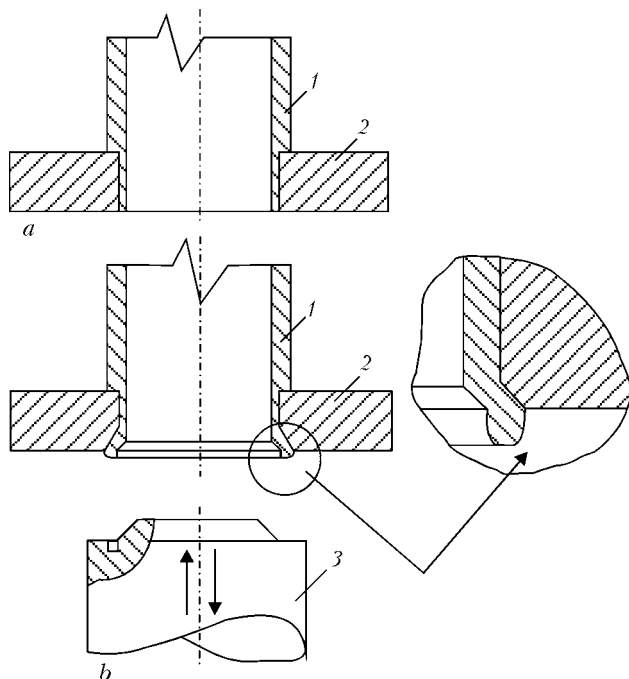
Schematics of a rigid flange joint (*a*) and its brazing with pipe flanging over the inner surface (*b*): 1 — pipe; 2 — flange; 3 — welding die
